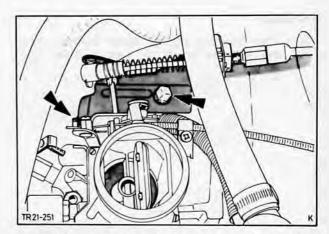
Unhook throttle cable at throttle linkage and remove with bracket
